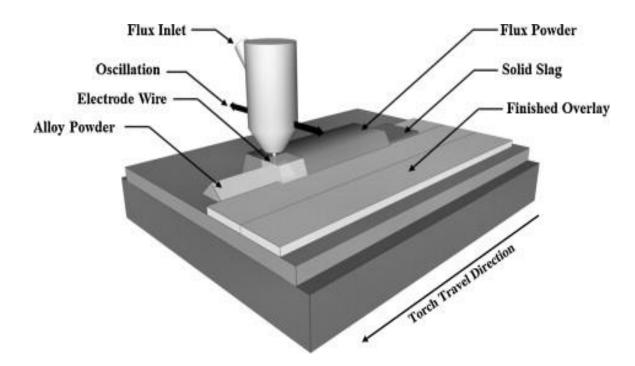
Schematic diagram of automatically processed submerged arc welding [7]
